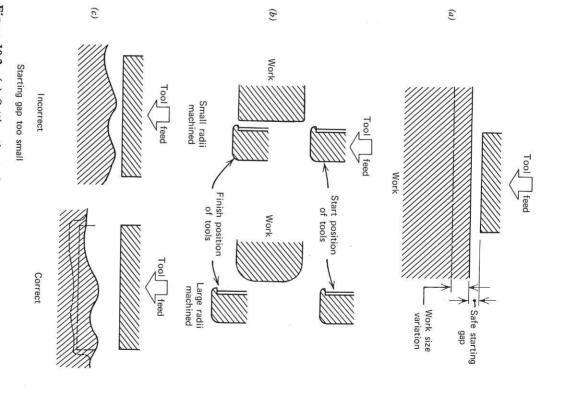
(a) Setting the tool to a safe starting gap. (b) Start and finish tool positions are used to control work piece radii. (c) Starting tool position for machining into an irregular surface.
